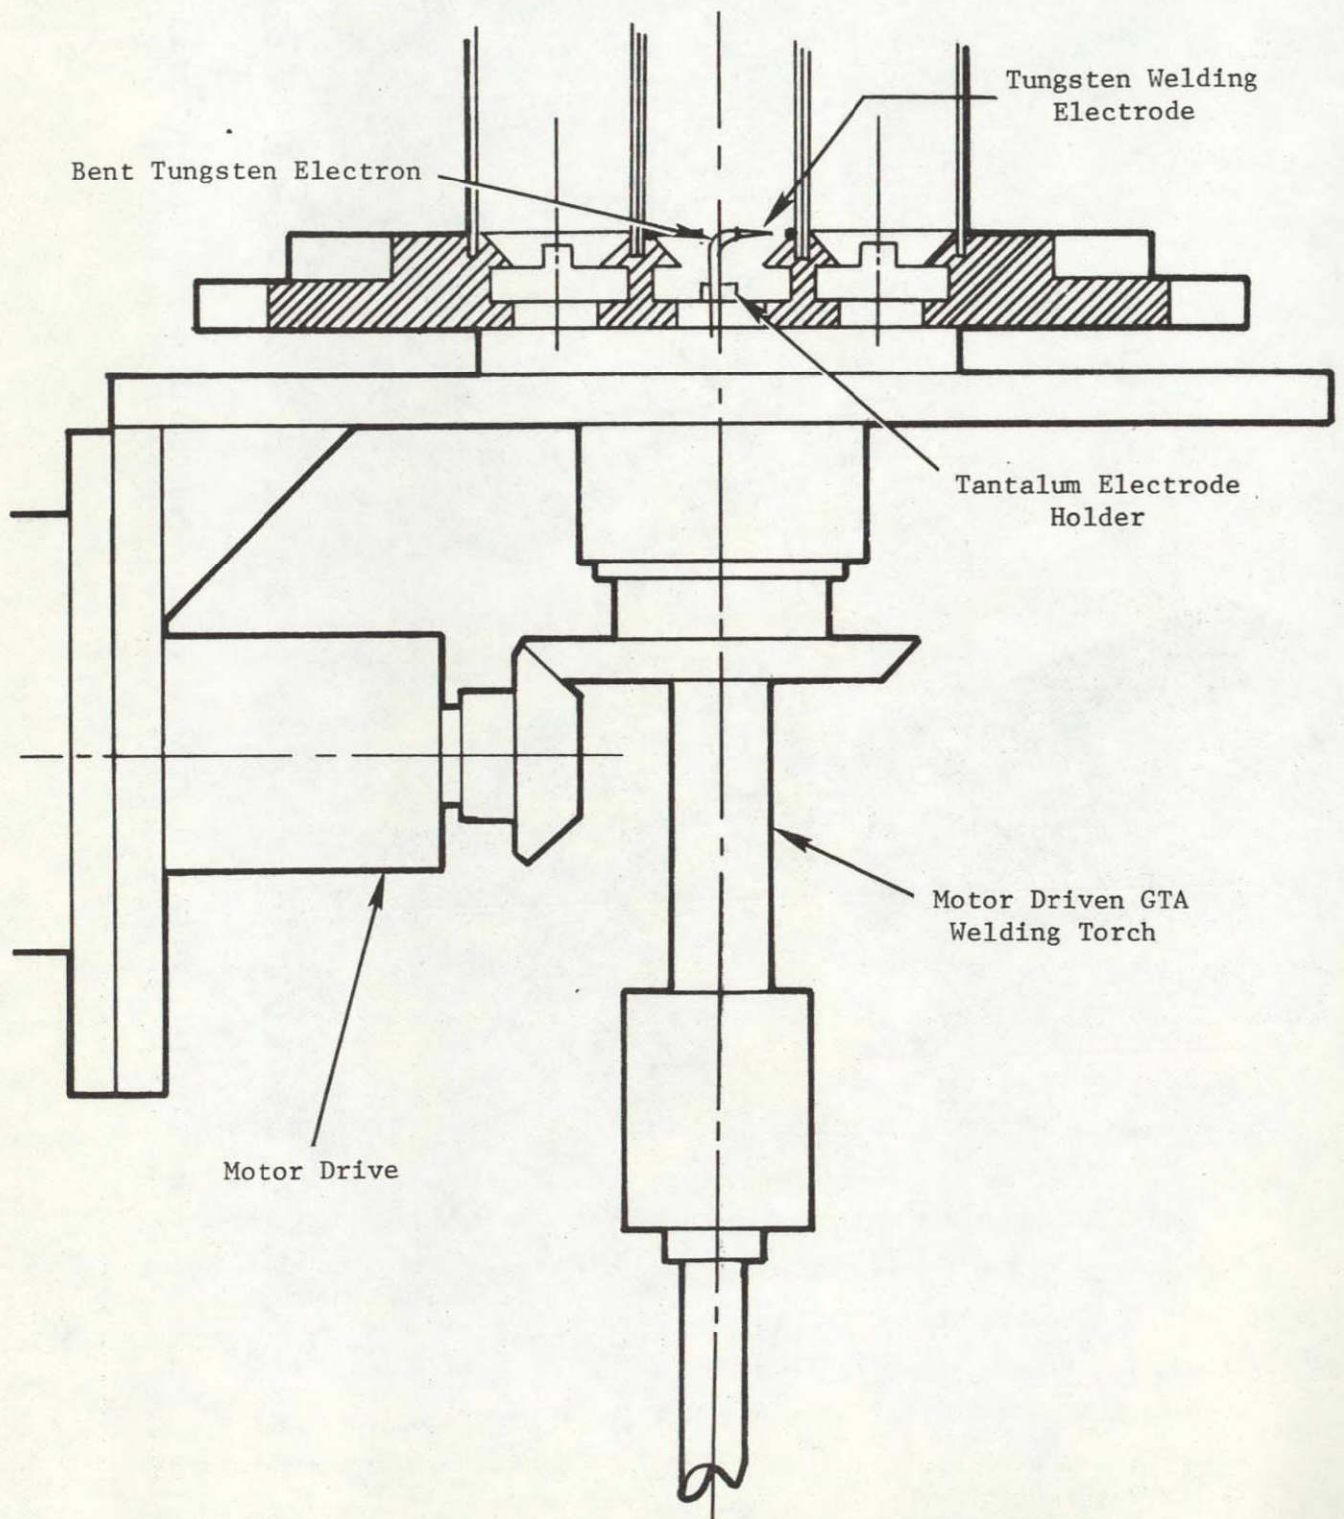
Internal Tube to Header Welding Arrangement.
